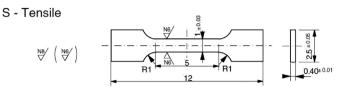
Dimensions (in mm) of the small tensile specimen of CLAM steel in STIP-V.
